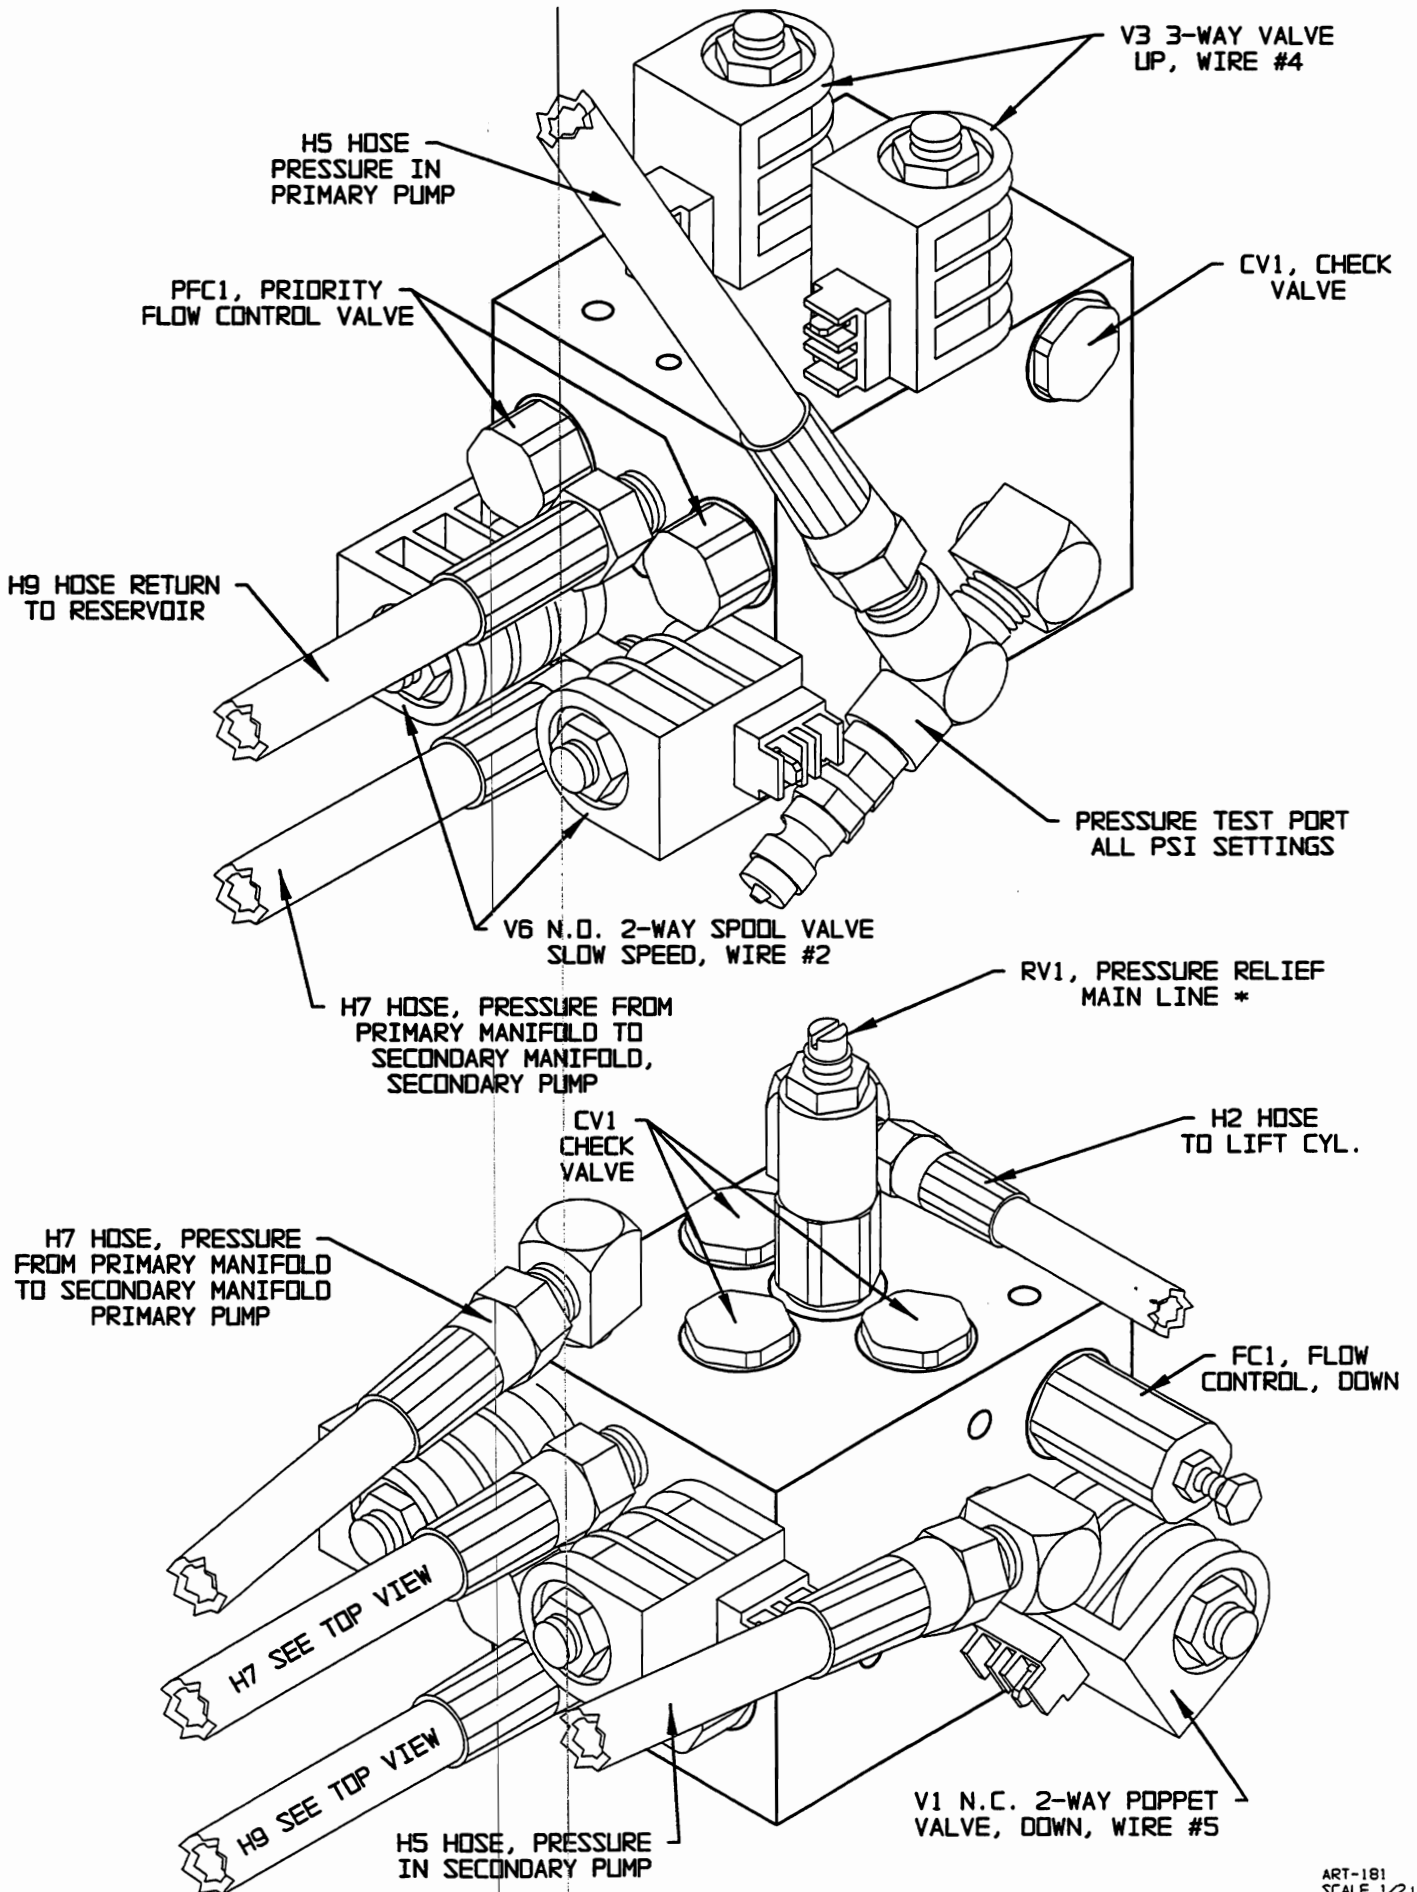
Dual Fuel Primary Manifold Assembly
